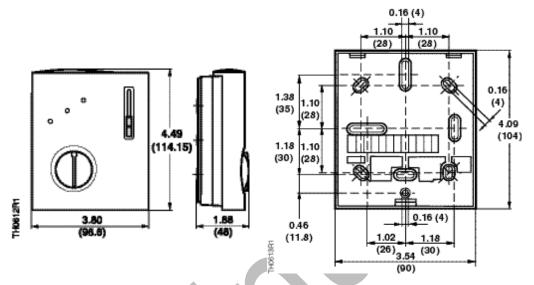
RCC10U and Base Plate in Inches (Millimeters).
